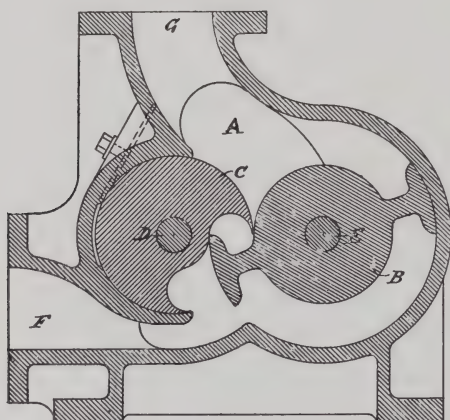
CROSS SECTION OF "GREINELL" ROTARY PUMP.
